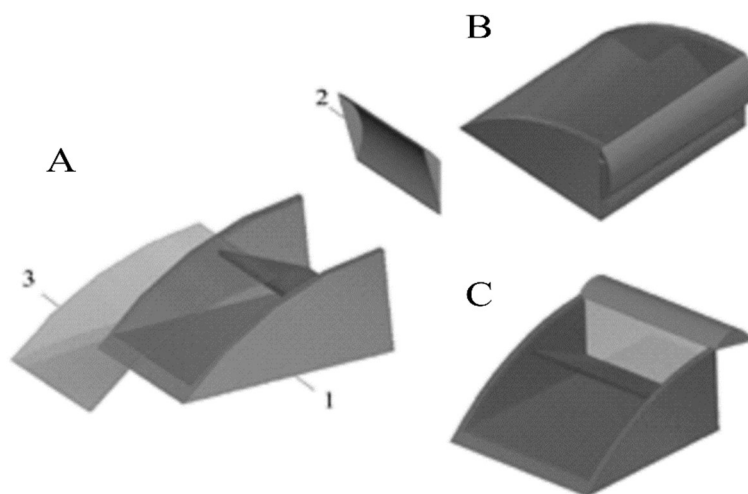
General view with explosion (A) and without explosion of the parts in the rear (B) and front (C) views of the airfoil.
